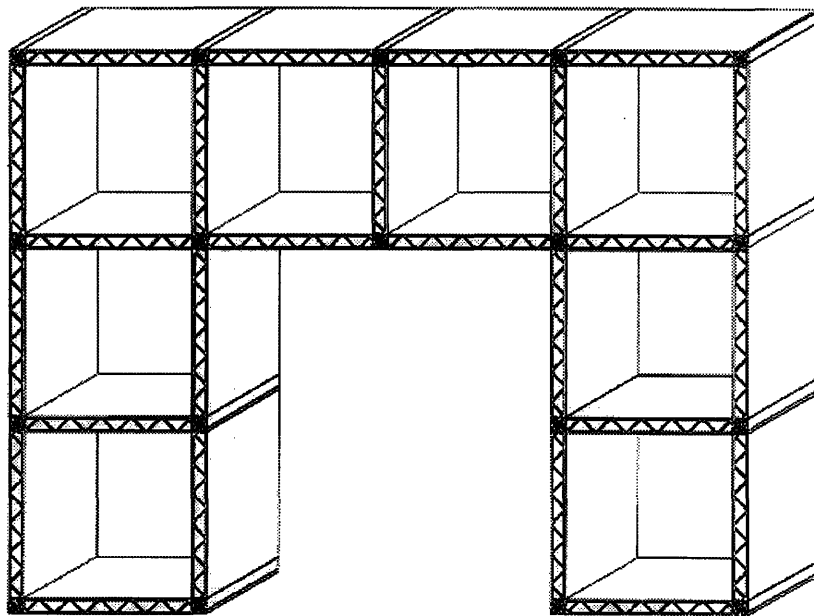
A bridge structure can be assembled using the interlocking panels used to make wall-sharing cubbies. This particular structure uses 25 panels for 8 cubbyholes and the bridge space.
